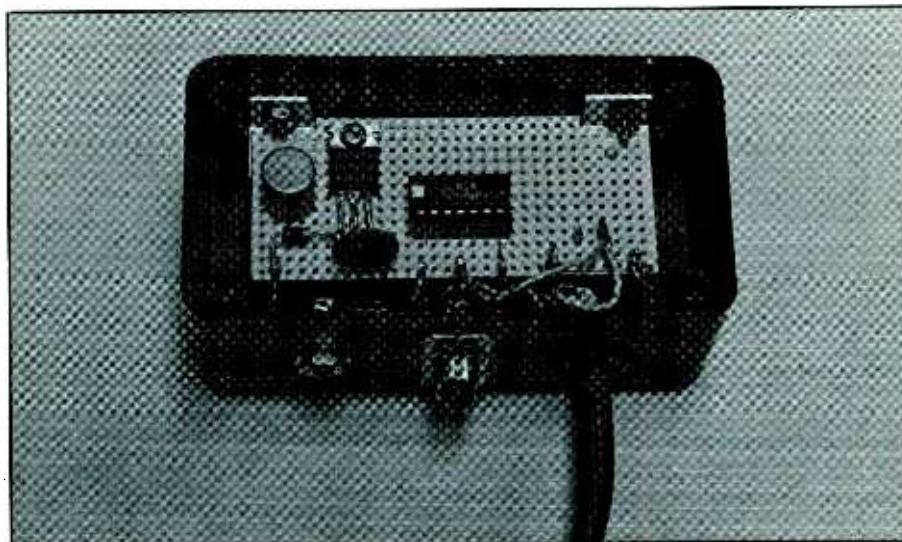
Interior view of author's prototype with circuitry assembled on perforated board and housed inside a common plastic project box.
